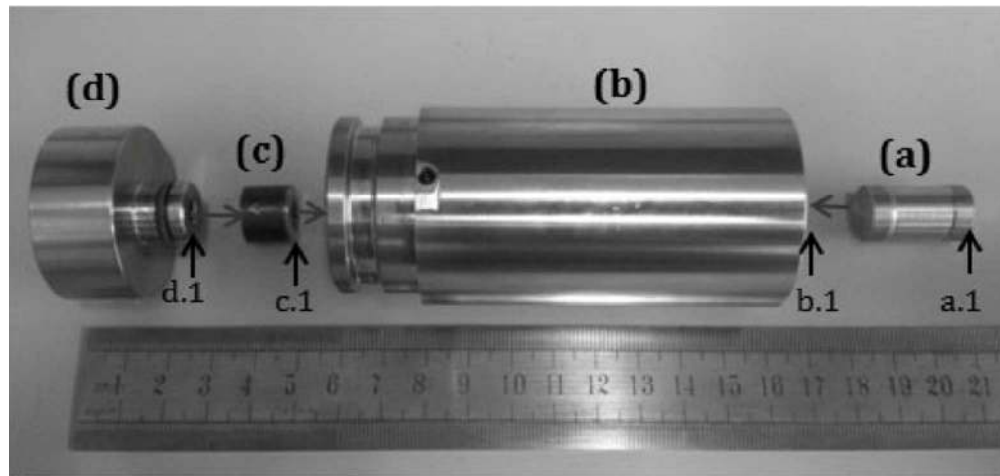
Parts of the small-scale extrusion assembly fabricated in-house: (a) bobbin which was positioned on top of the glass-stack feed and beneath the piston; (b) stainless steel, small-scale extruder barrel of 30 ± 0.25 mm OD and 14 ± 0.25 mm ID; (c) small extrusion die of 14 ± 0.25 mm entry ID and 3.2mm exit ID; the die was internally lined with graphite and (d) the vacuum seal fixture fitted with a heat-resistant O-ring. The horizontal arrows show the direction of fit of each part into the others.
